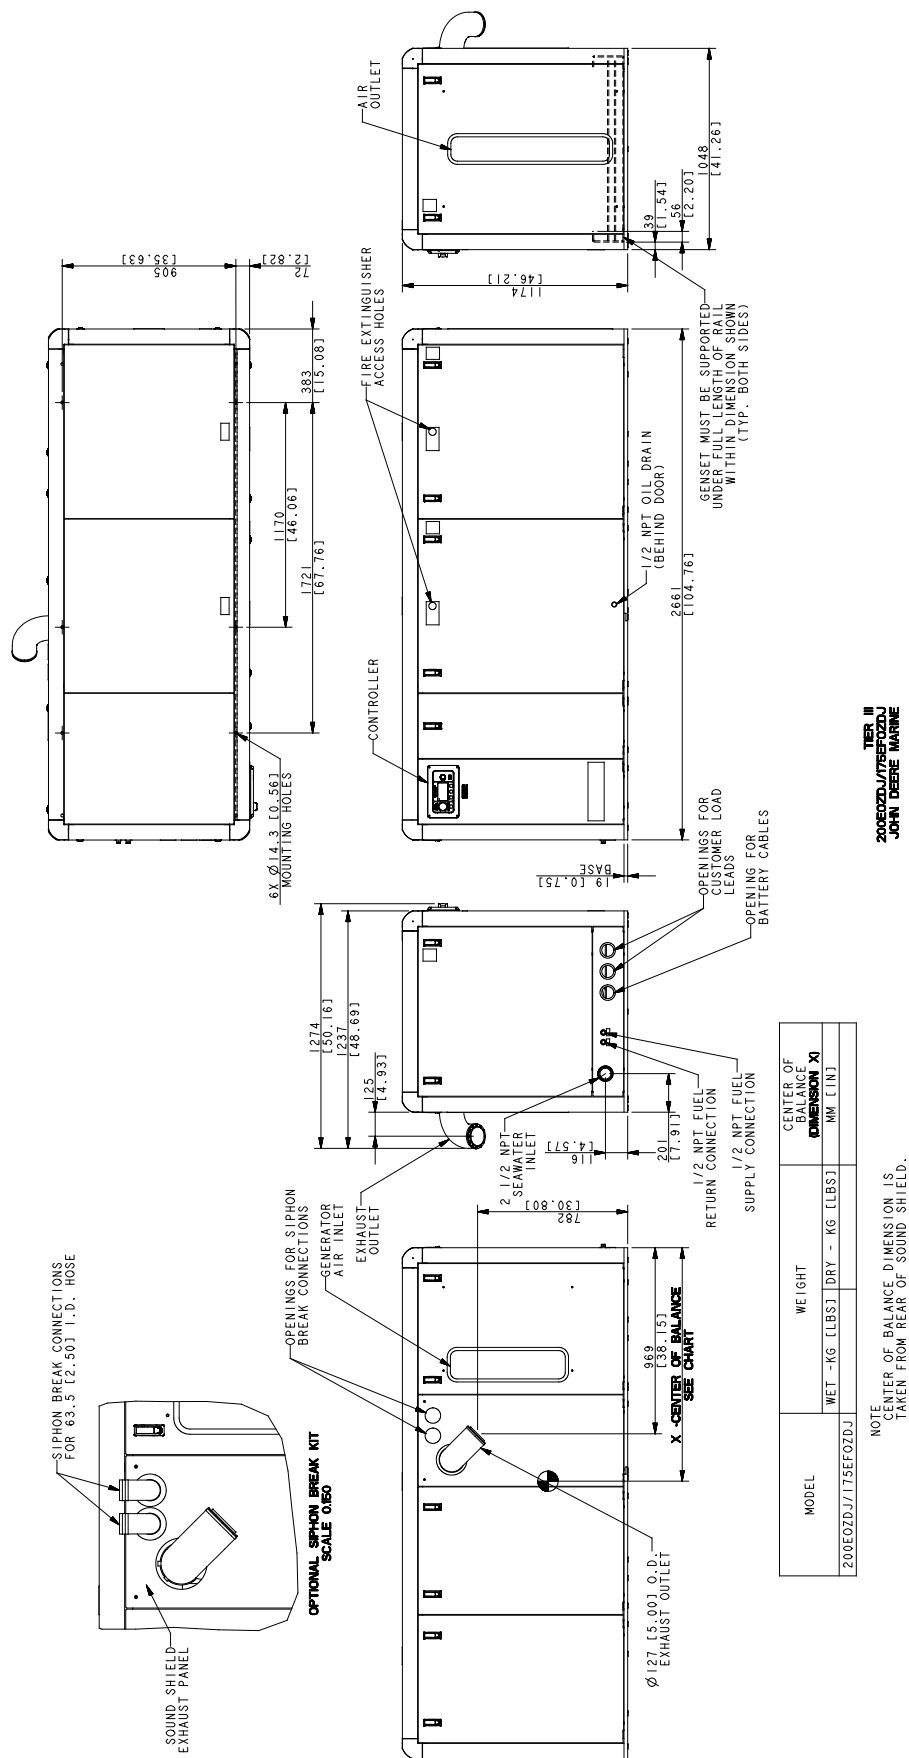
Dimension Drawing, 200EOZD(C)J & 175EFOZD(C)J (Open Unit Sheet 1 of 2)
